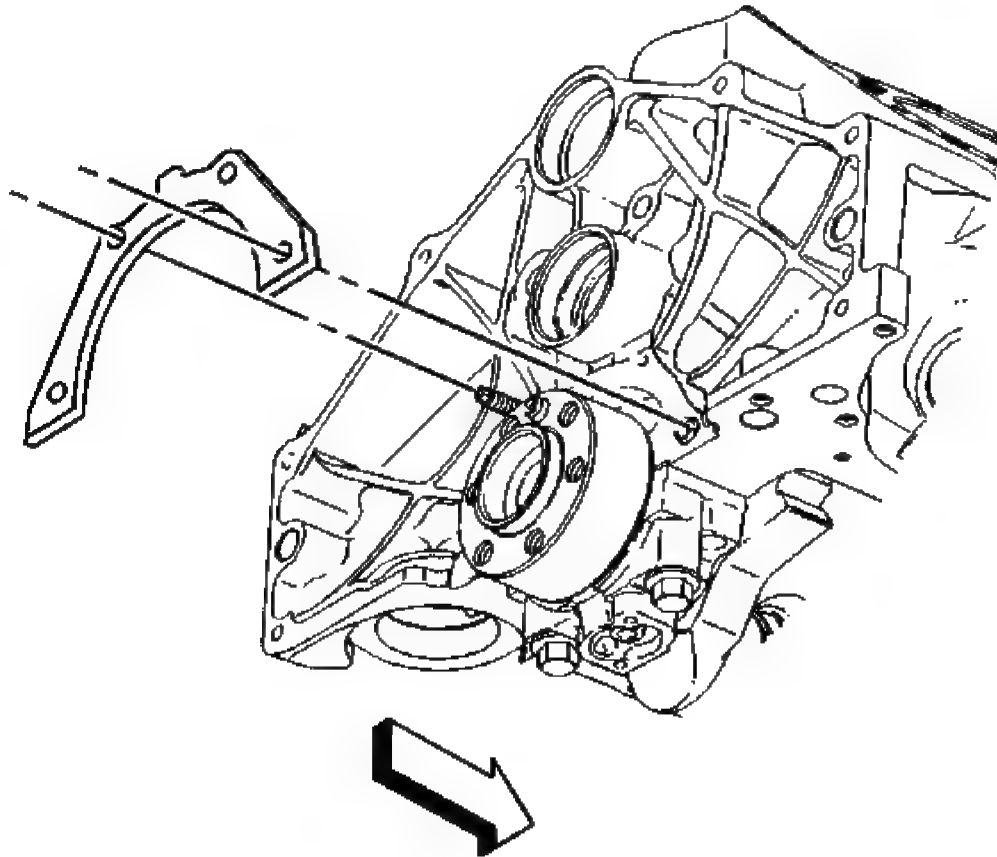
Locating Crankshaft Rear Oil Seal Housing Gasket
